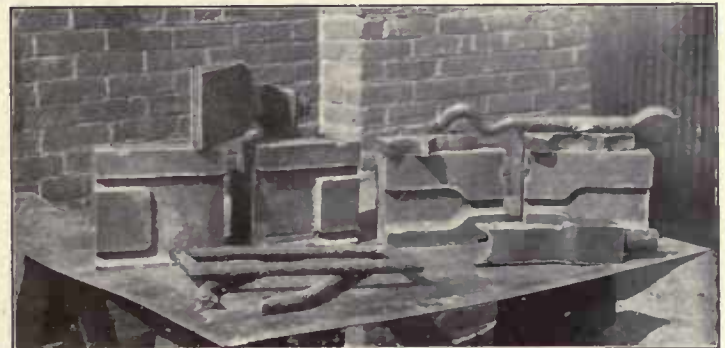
Brake Beam and U-Shape Hanger Dies.
